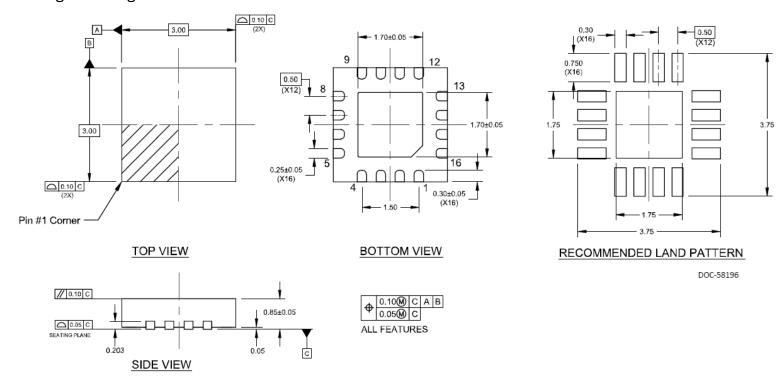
Package mechanical drawing for the 16-lead 3 × 3 mm QFN package
